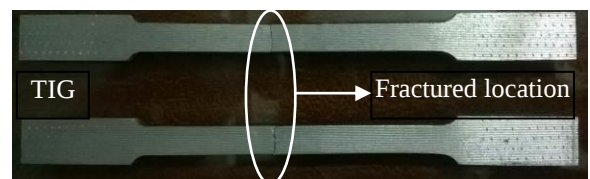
Tensile fractured locations in the TIG welding
